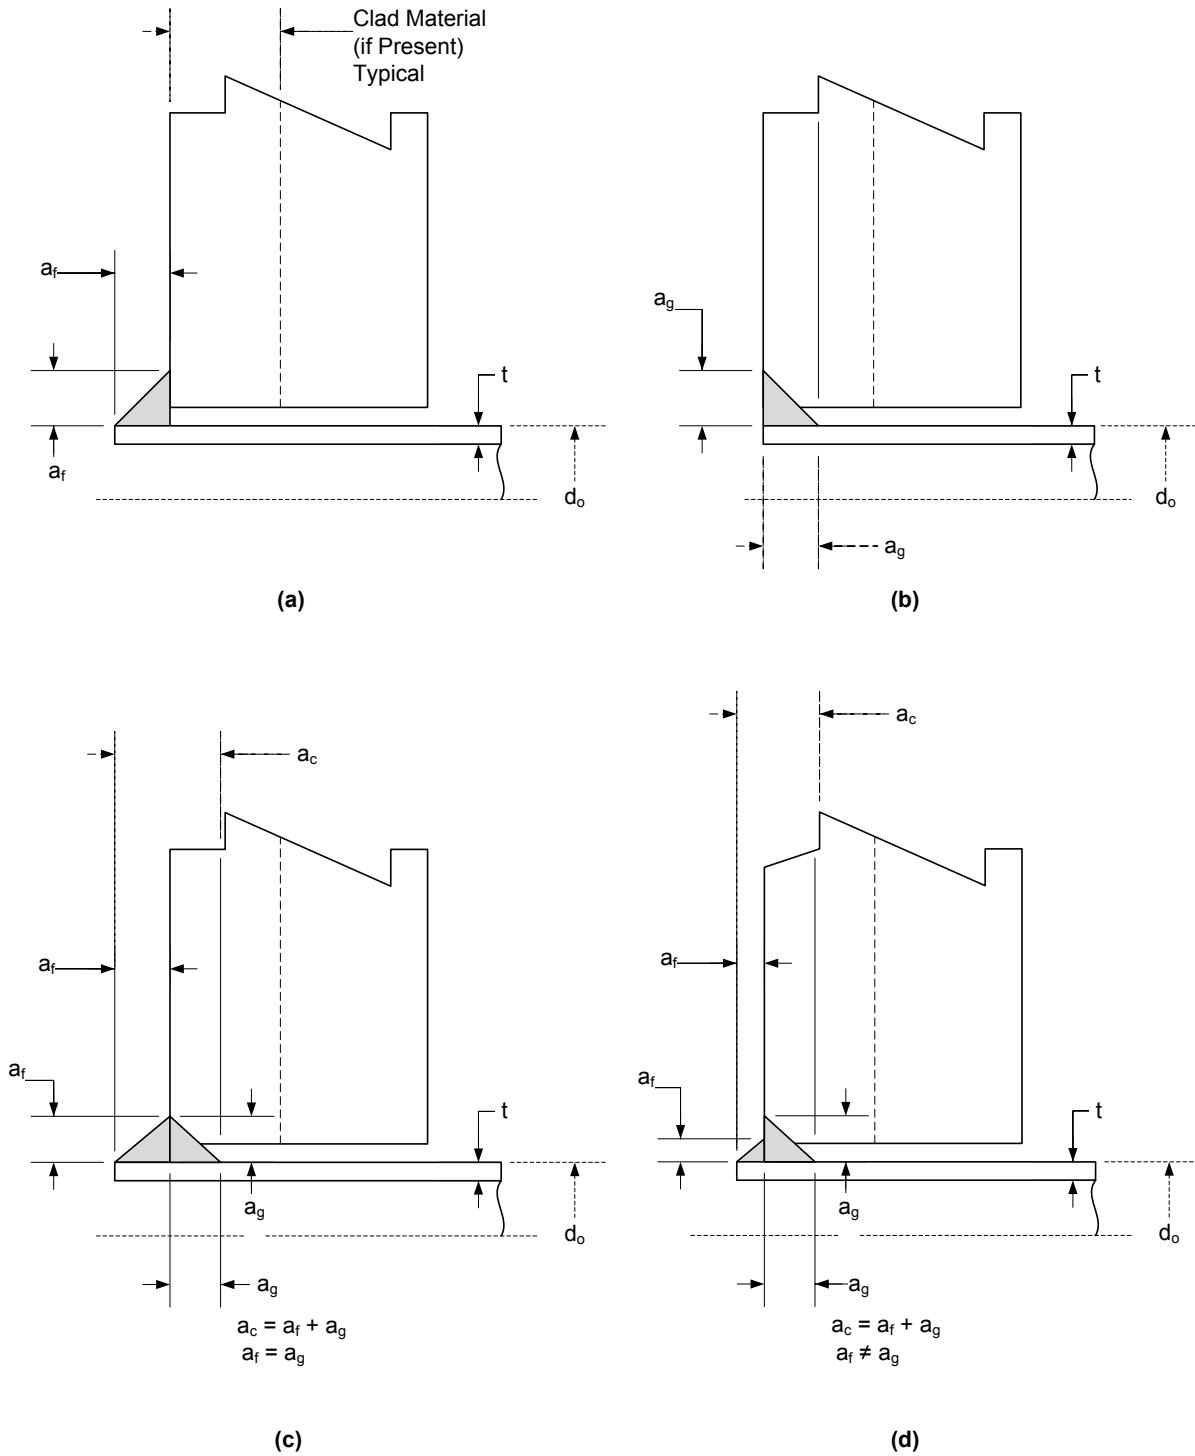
Tube-to-Tubesheet Welds
